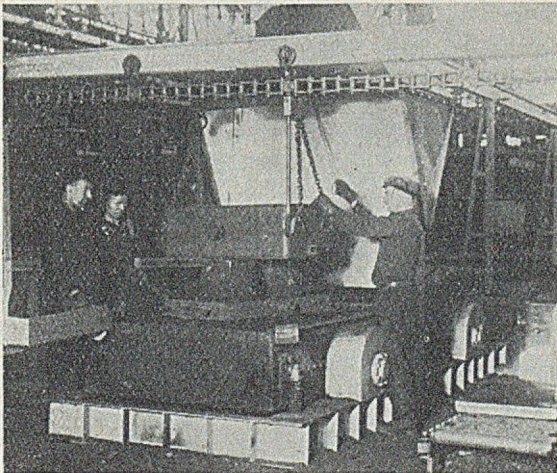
One of the Knock-outs for Larger Castings, showing Exhaust Hood (behind) and Pendulum Chain Conveyor for Removing Castings.
